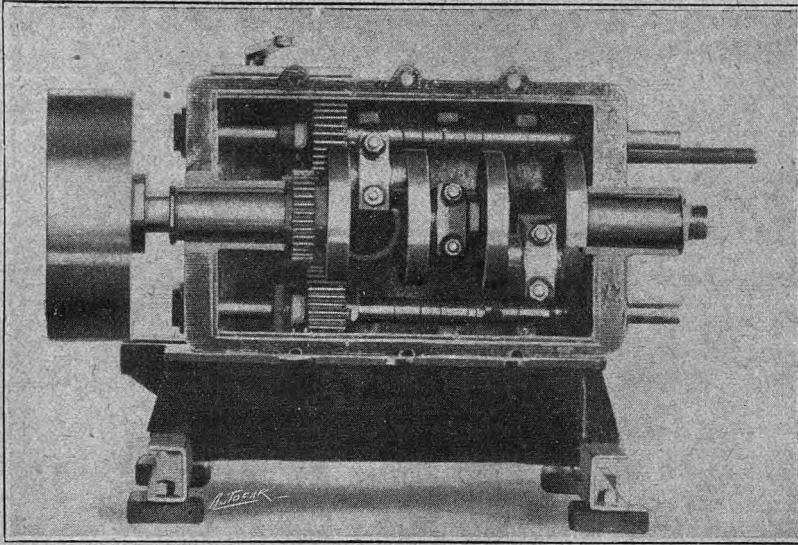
An under view of the engine, with the lower half of the crank case removed.
